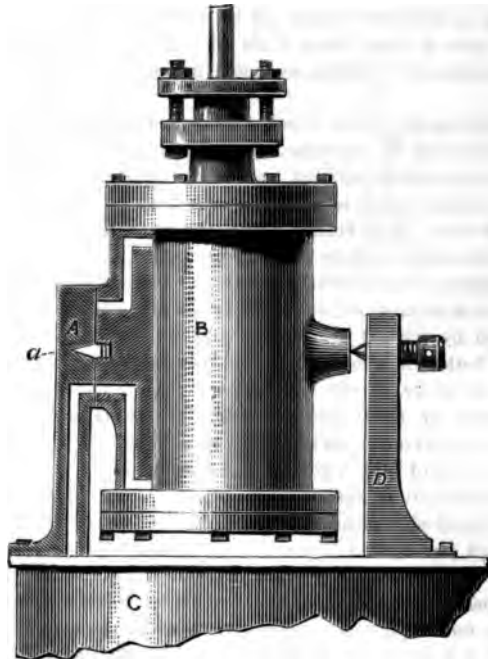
PART SECTION OF OSCILLATING CYLINDER AND ITS ATTACHMENTS.
